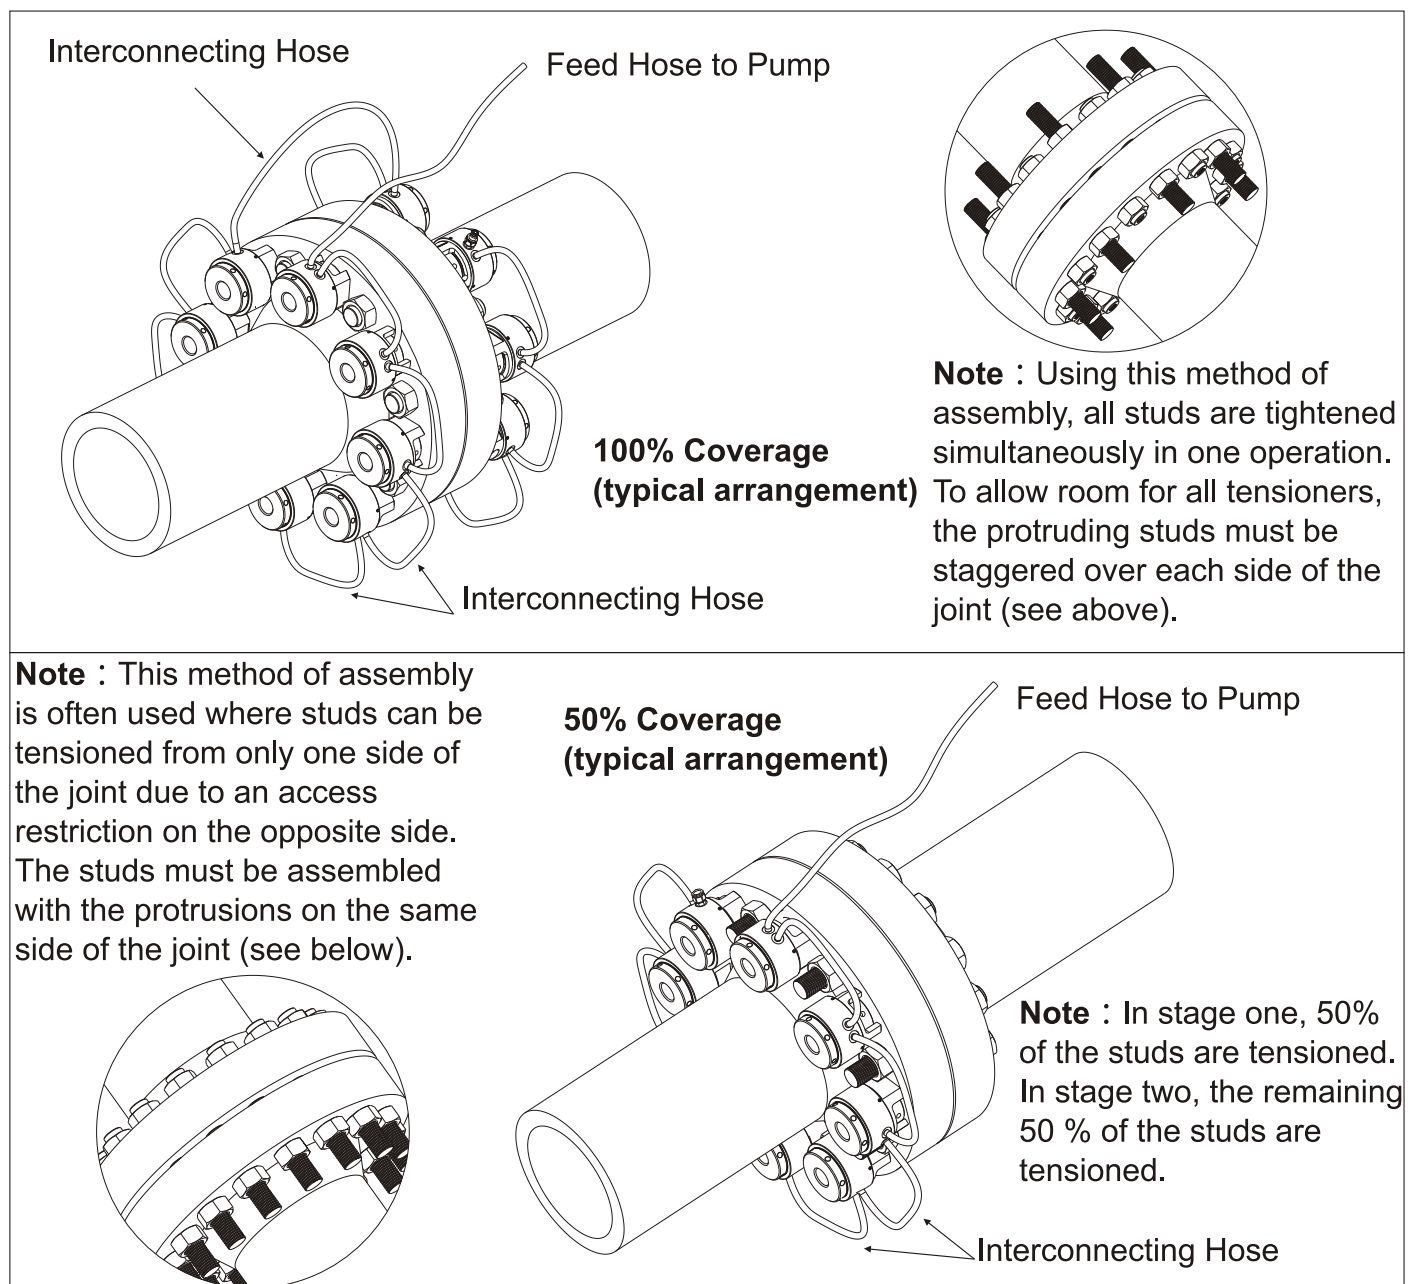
Hydraulic Tensioner Mounting Arrangement (typical)
